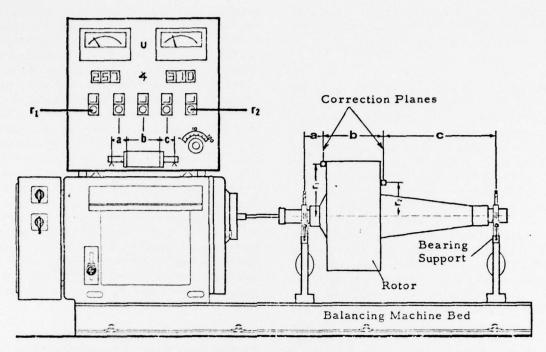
Typical Hard-Bearing Balancing Machine with Permanently Calibrated Instrumentation.
